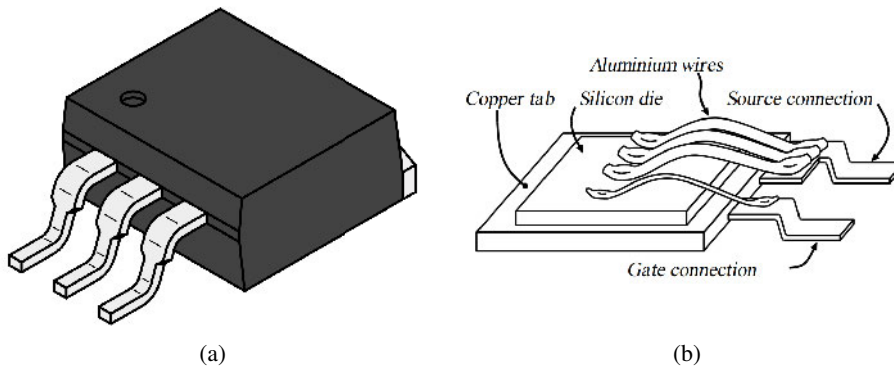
(a) Drawing of a TO 263 package. (b) Drawing of a packaged active component without the resin mold . The backside of the chip is soldered to the tab and the topside is connected to the leads using wirebonds [19].
